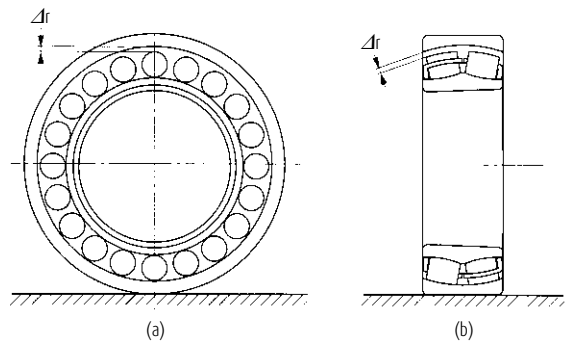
Clearance Measurement Point (Bearing Outside Diameter: Less Than 200 mm)
